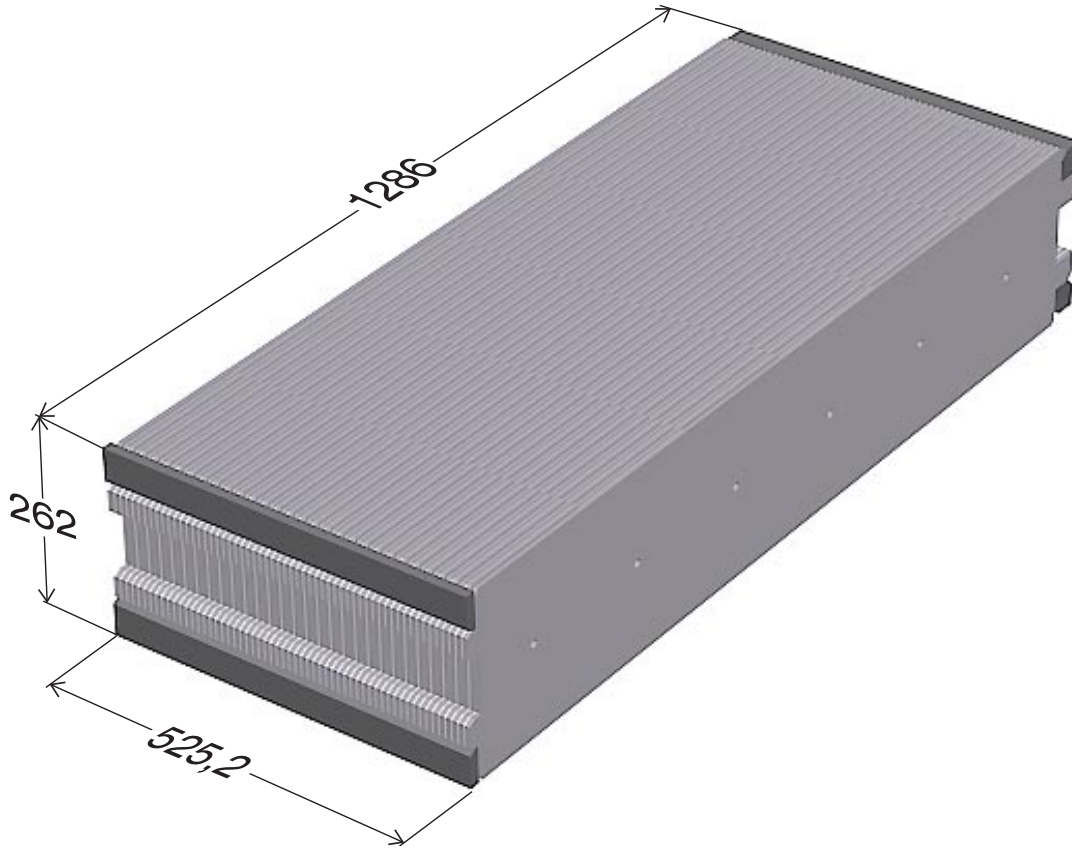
The constructed submodule with a basic dimensions. The depth is 3 mm larger than master plate length due to the welded beams at the rear side, where the back-holder is screwed down.
